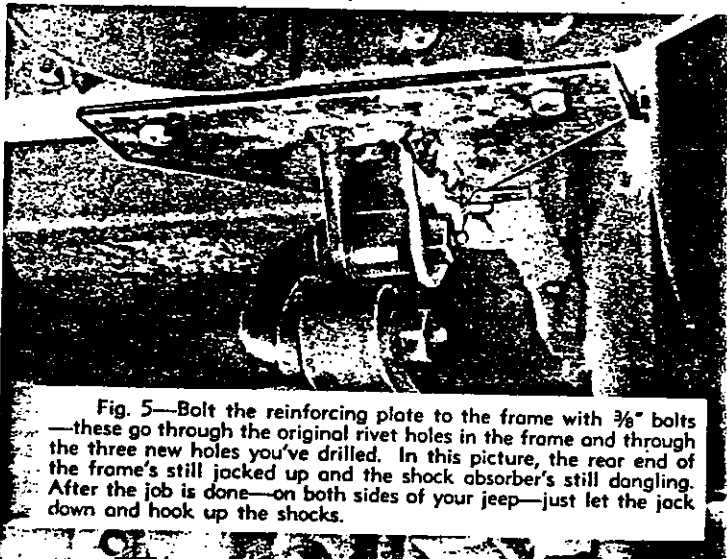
Bolt the reinforcing plate to the frame with $\frac{3}{8}$ " bolts—these go through the original rivet holes in the frame and through the three new holes you've drilled. In this picture, the rear end of the frame's still jacked up and the shock absorber's still dangling. After the job is done—on both sides of your jeep—just let the jack down and hook up the shocks.
